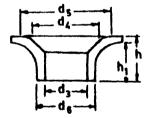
DETAILS OF WASTE HOLES FOR KITCHEN AND LABORATORY SINKS
